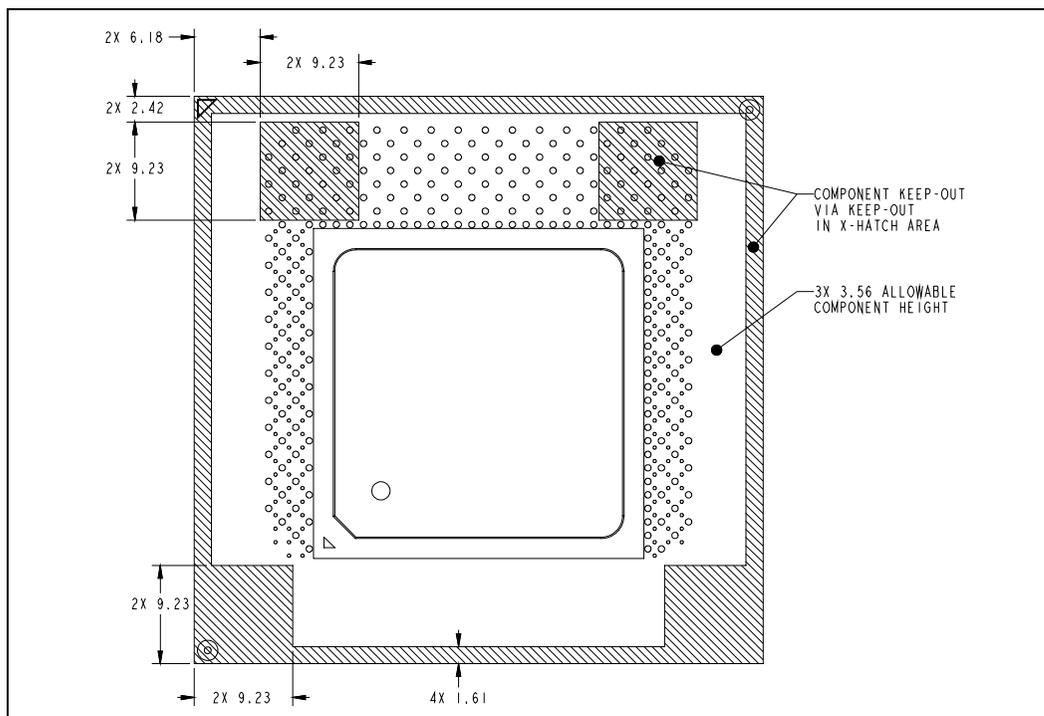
details the keep in specification for pin-side components. The processor may contain pin side capacitors mounted to the processor package. The capacitors will be exposed within the opening of the interposer cavity. This keep-in specification applies to both packages.
